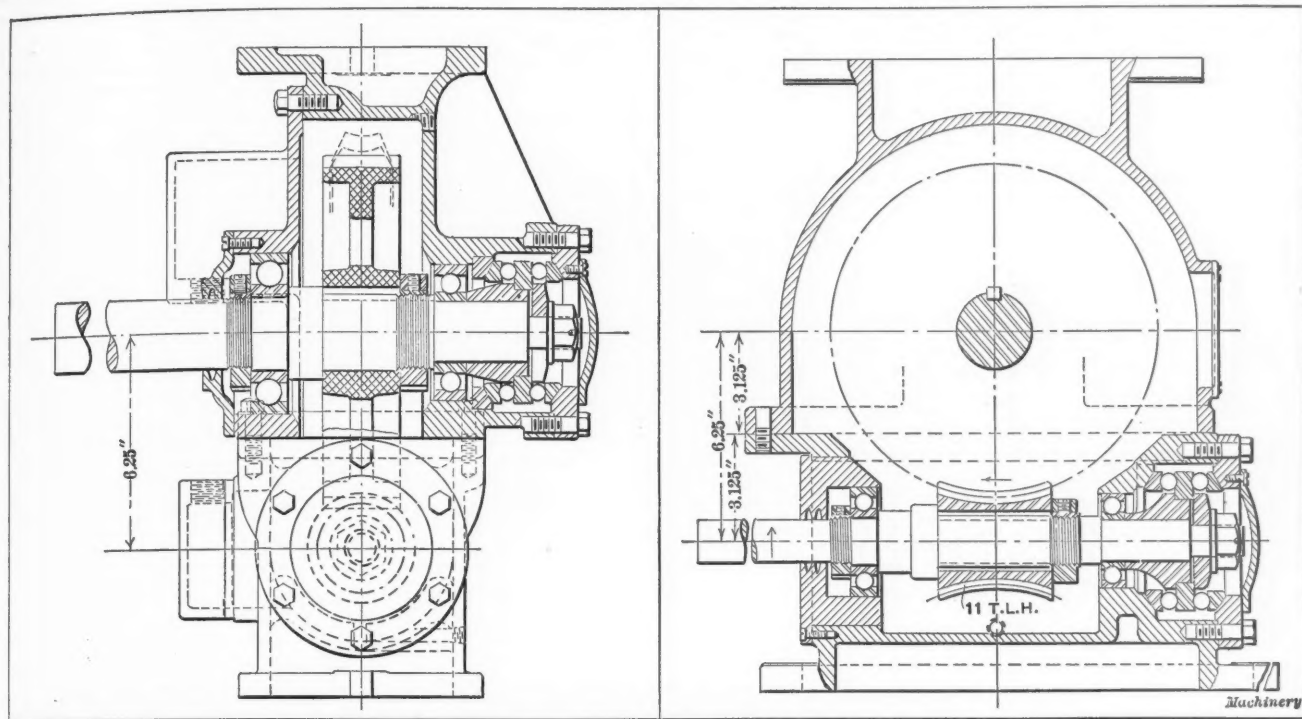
Section through Gear Case used for Testing Worm-gear Drives
